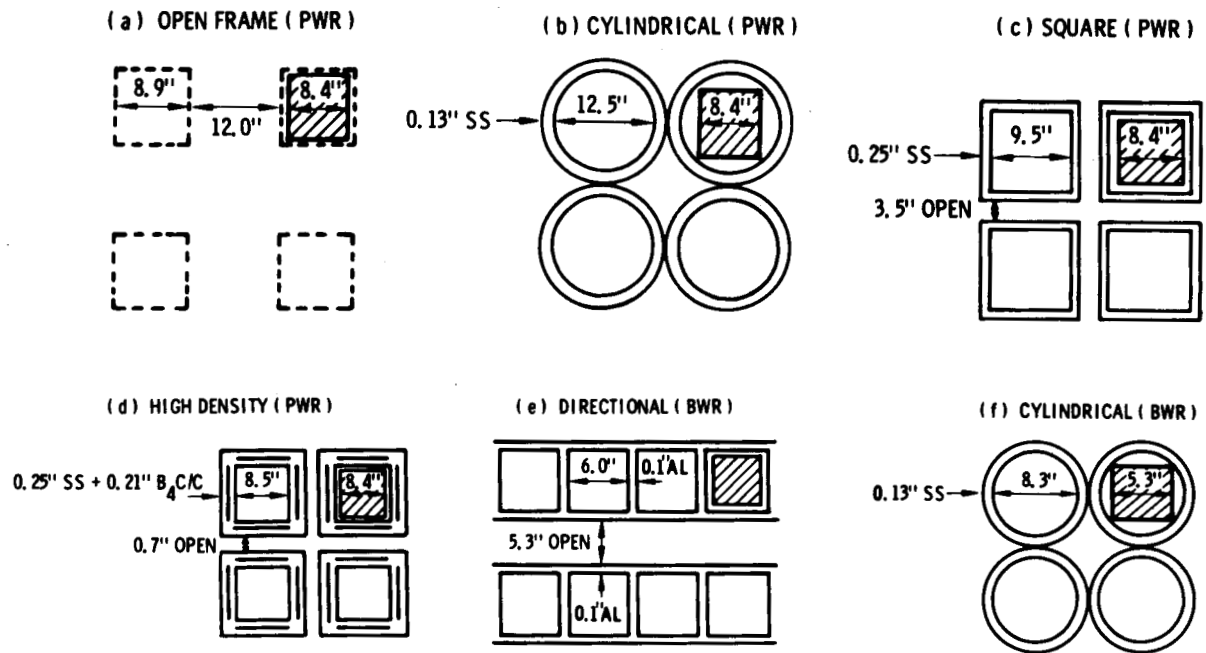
Cross Sectional Dimensions of Spent Fuel Holders Shown in Fig. 2.
